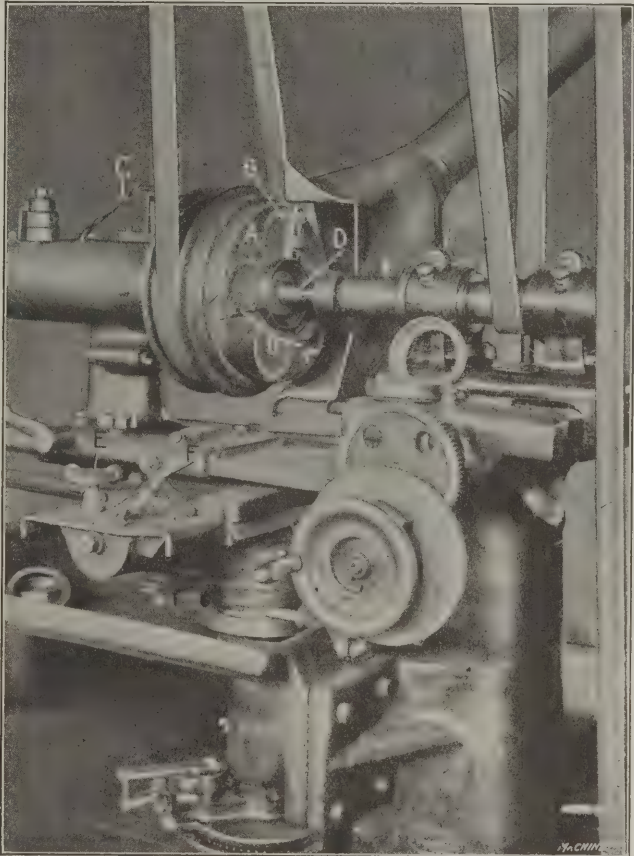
"Oscillator" Grinding Machine for Cup Races
